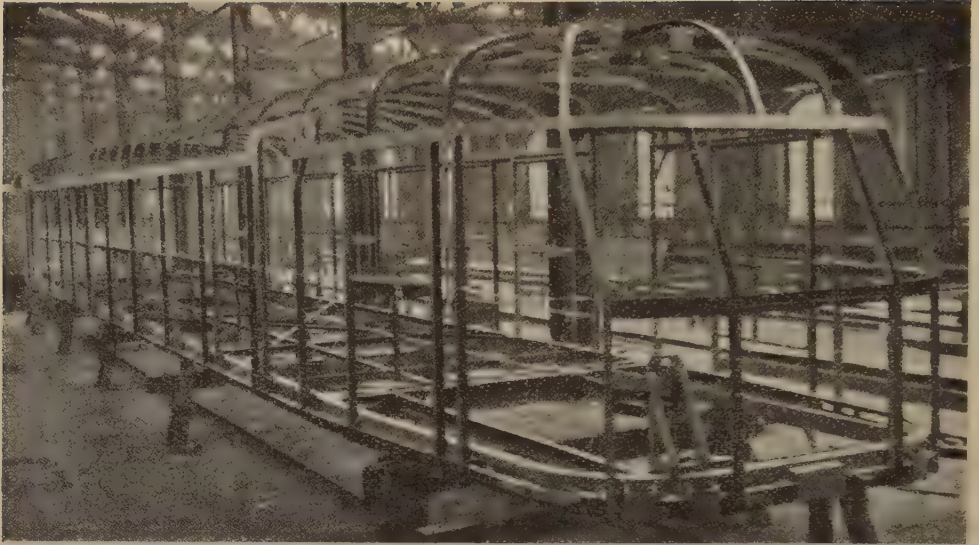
Welded body framing of high-tensile chrome-steel stampings. The length of the framing is 72 ft., and the width 9 ft. 6 in.
